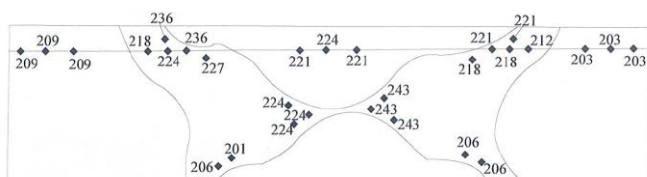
Scheme of hardness locations on a double butt-welded joint before PWHT (magn. 2×).
